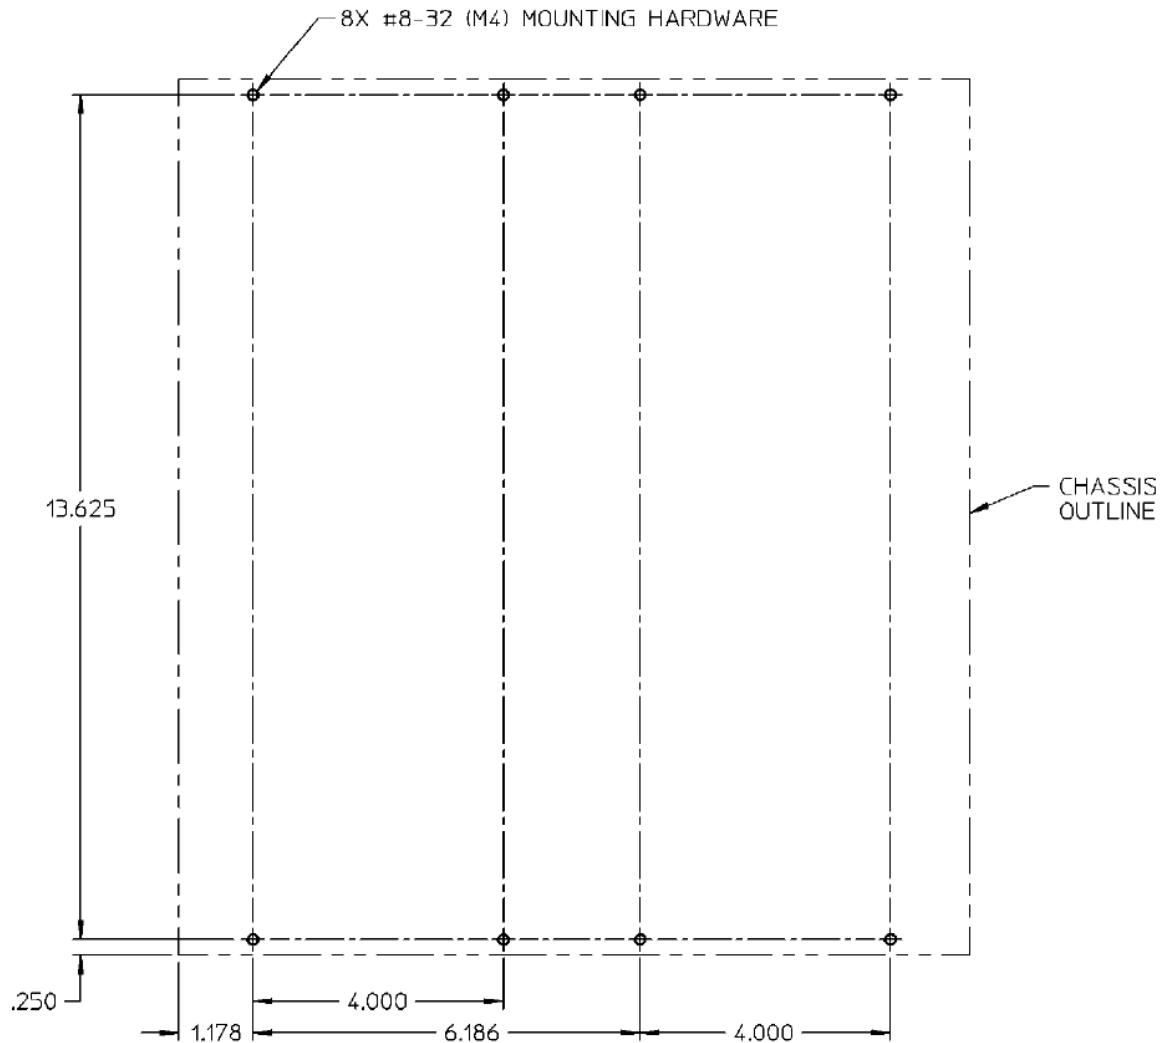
Mounting Template for the 505DE Short Chassis (Dimensions in Inches)
